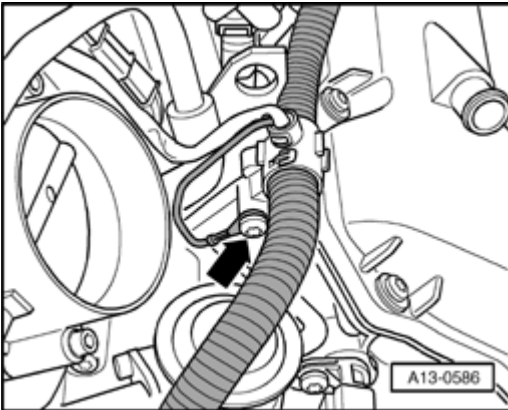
Removing Ground (GND) Cable On Right Cylinder Head
